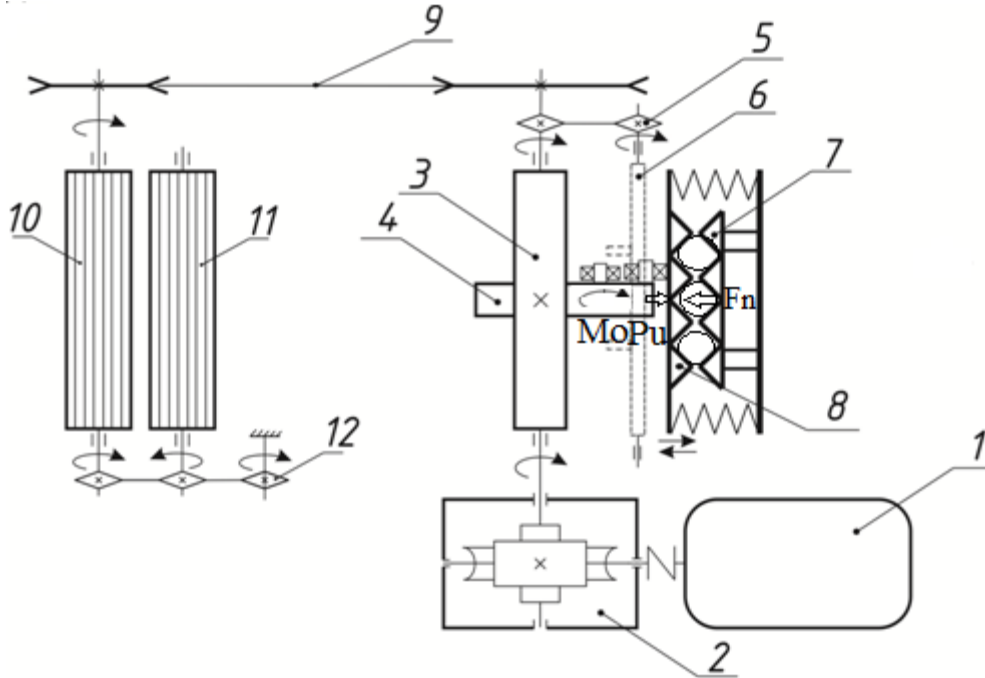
Kinematic diagram of the combined machine: 1-electric motor, 2- crank gear, 3-working shaft with a knuckle, 4-plate (sektor), 5-chain transmission 6- portion shaft, 7- breaking part (stationary), 8 -breaking progressive-return striker, 9-belt transmission, 10,11- working shafts with rifled cells, 12- differential chain transmission
